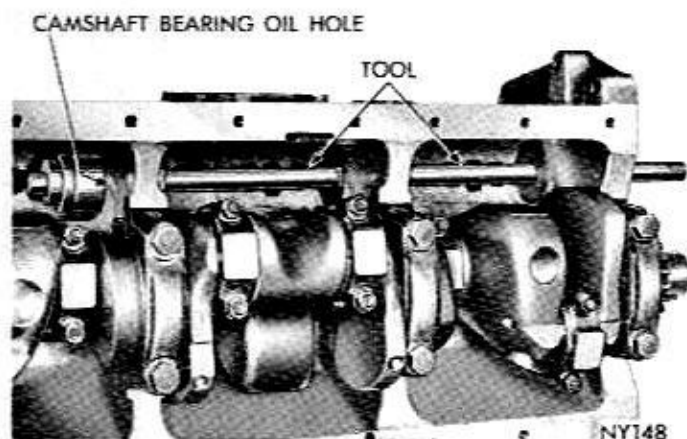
Removing Camshaft Bearings (Tool C-3132A)
